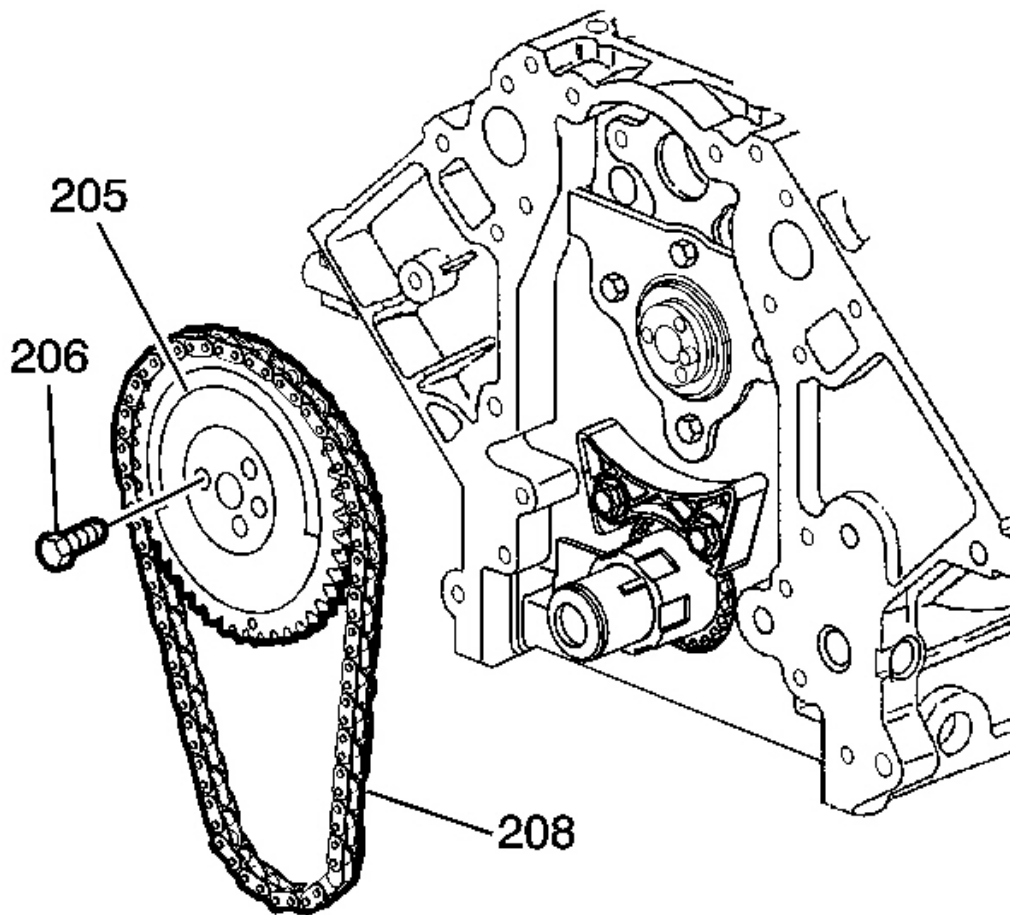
View Of Camshaft Sprocket, Bolts & Timing Chain
